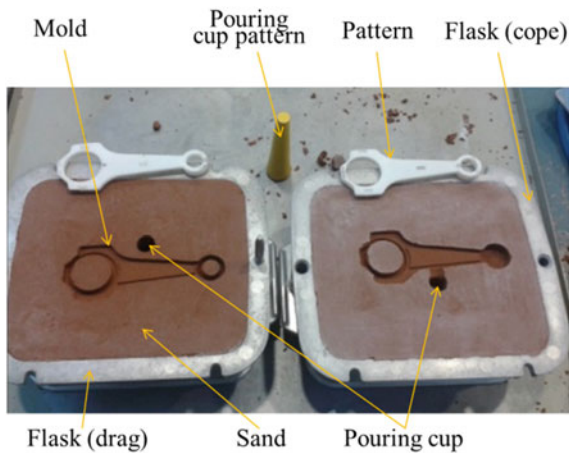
Sand casting process. Open mold with pattern extracted ready to be closed
